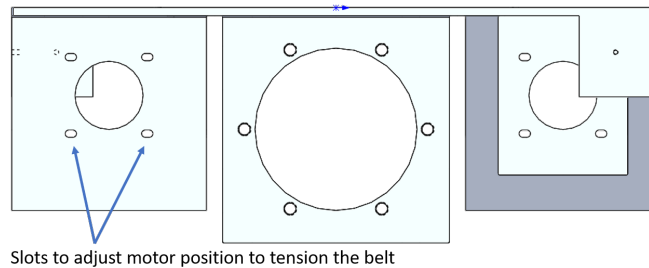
Belt tensioning scheme (Top view of motor mounting plate assembly)
